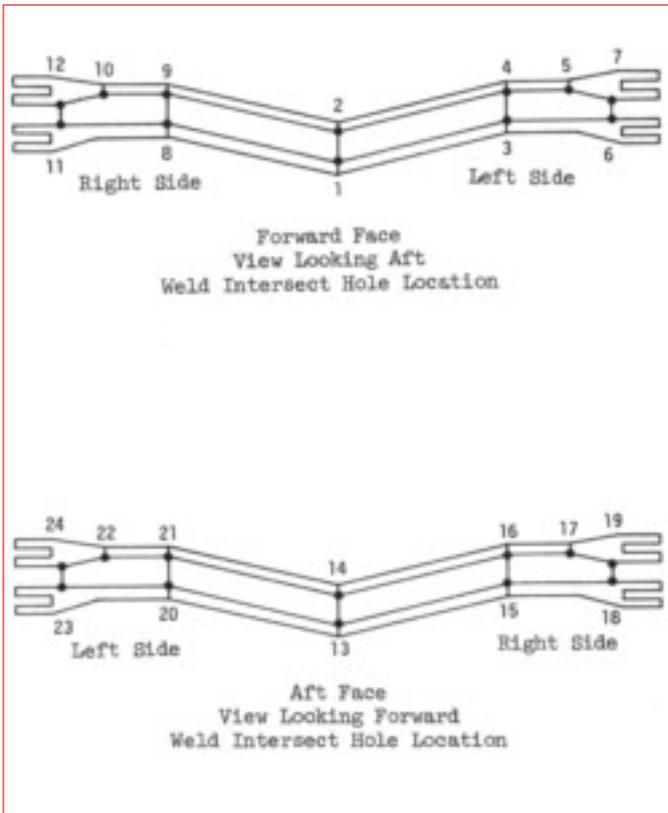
Line drawings of the F-14 wing center section. The black dots are the weld intersect hole locations. These holes were bored to remove any trace of possible spiking defects commonly associated with deep partial-penetration EB welds. Each location is where a complete joint penetration weld crosses over an underlying beam or web.
